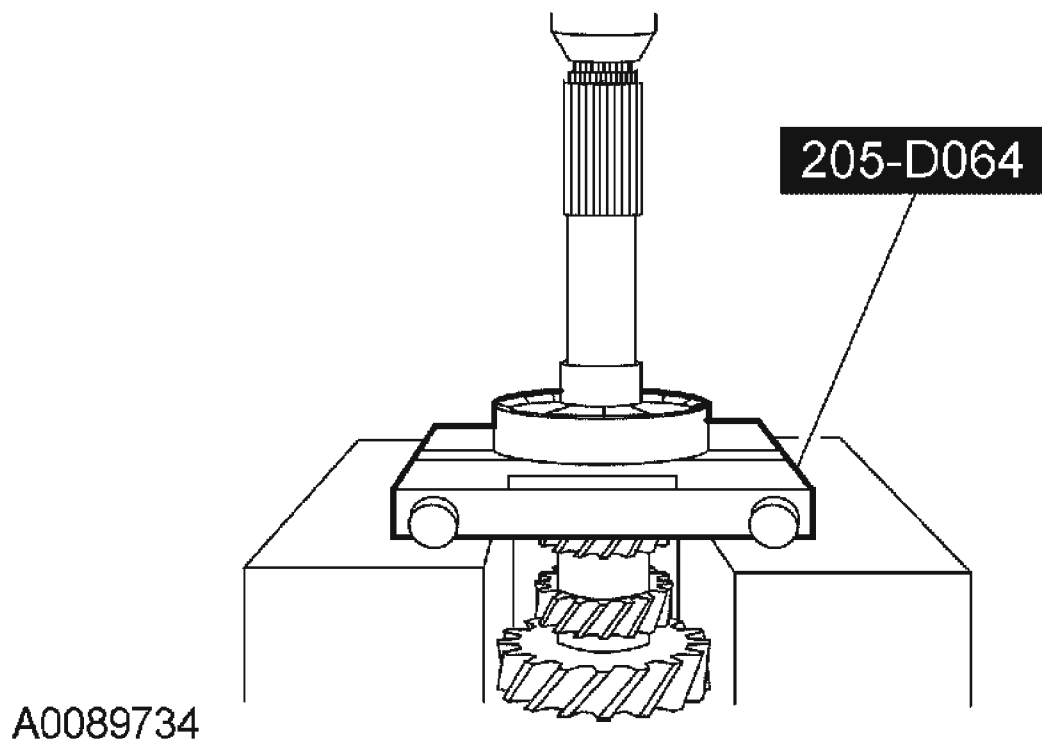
Discarding 5th Gear Synchronizer Ring And Assembly
